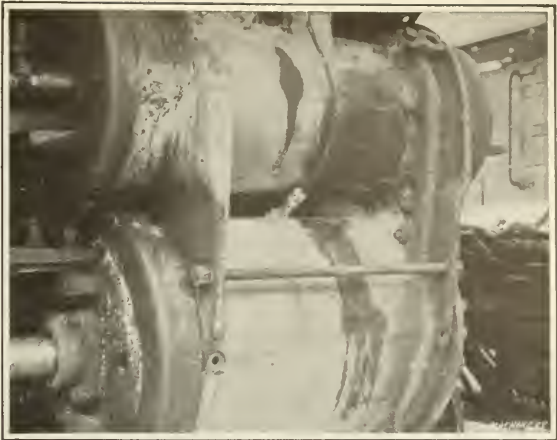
View of Parts shown in Fig. 5 after being repaired with Wilson Electric Welder
